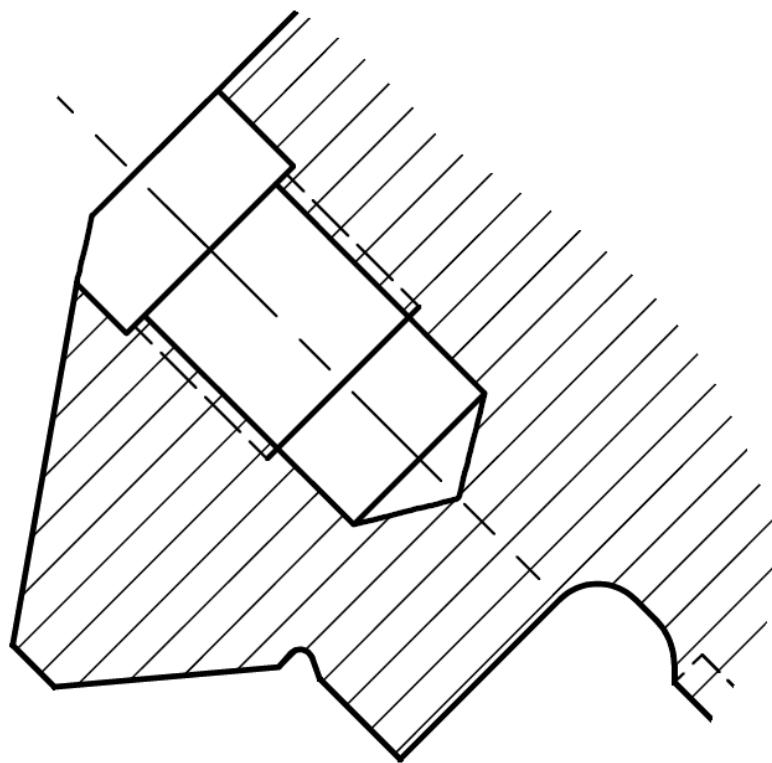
Small threaded hole on the head of a locking bolt.
